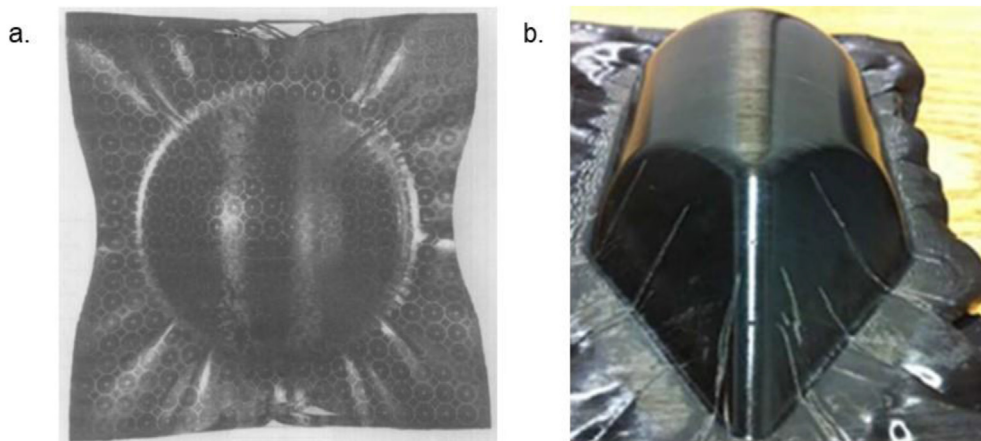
Wrinkles in final formed parts: (a) hemisphere and (b) shape containing cylindrical portion, quarter sphere and flat faces [56,92].
